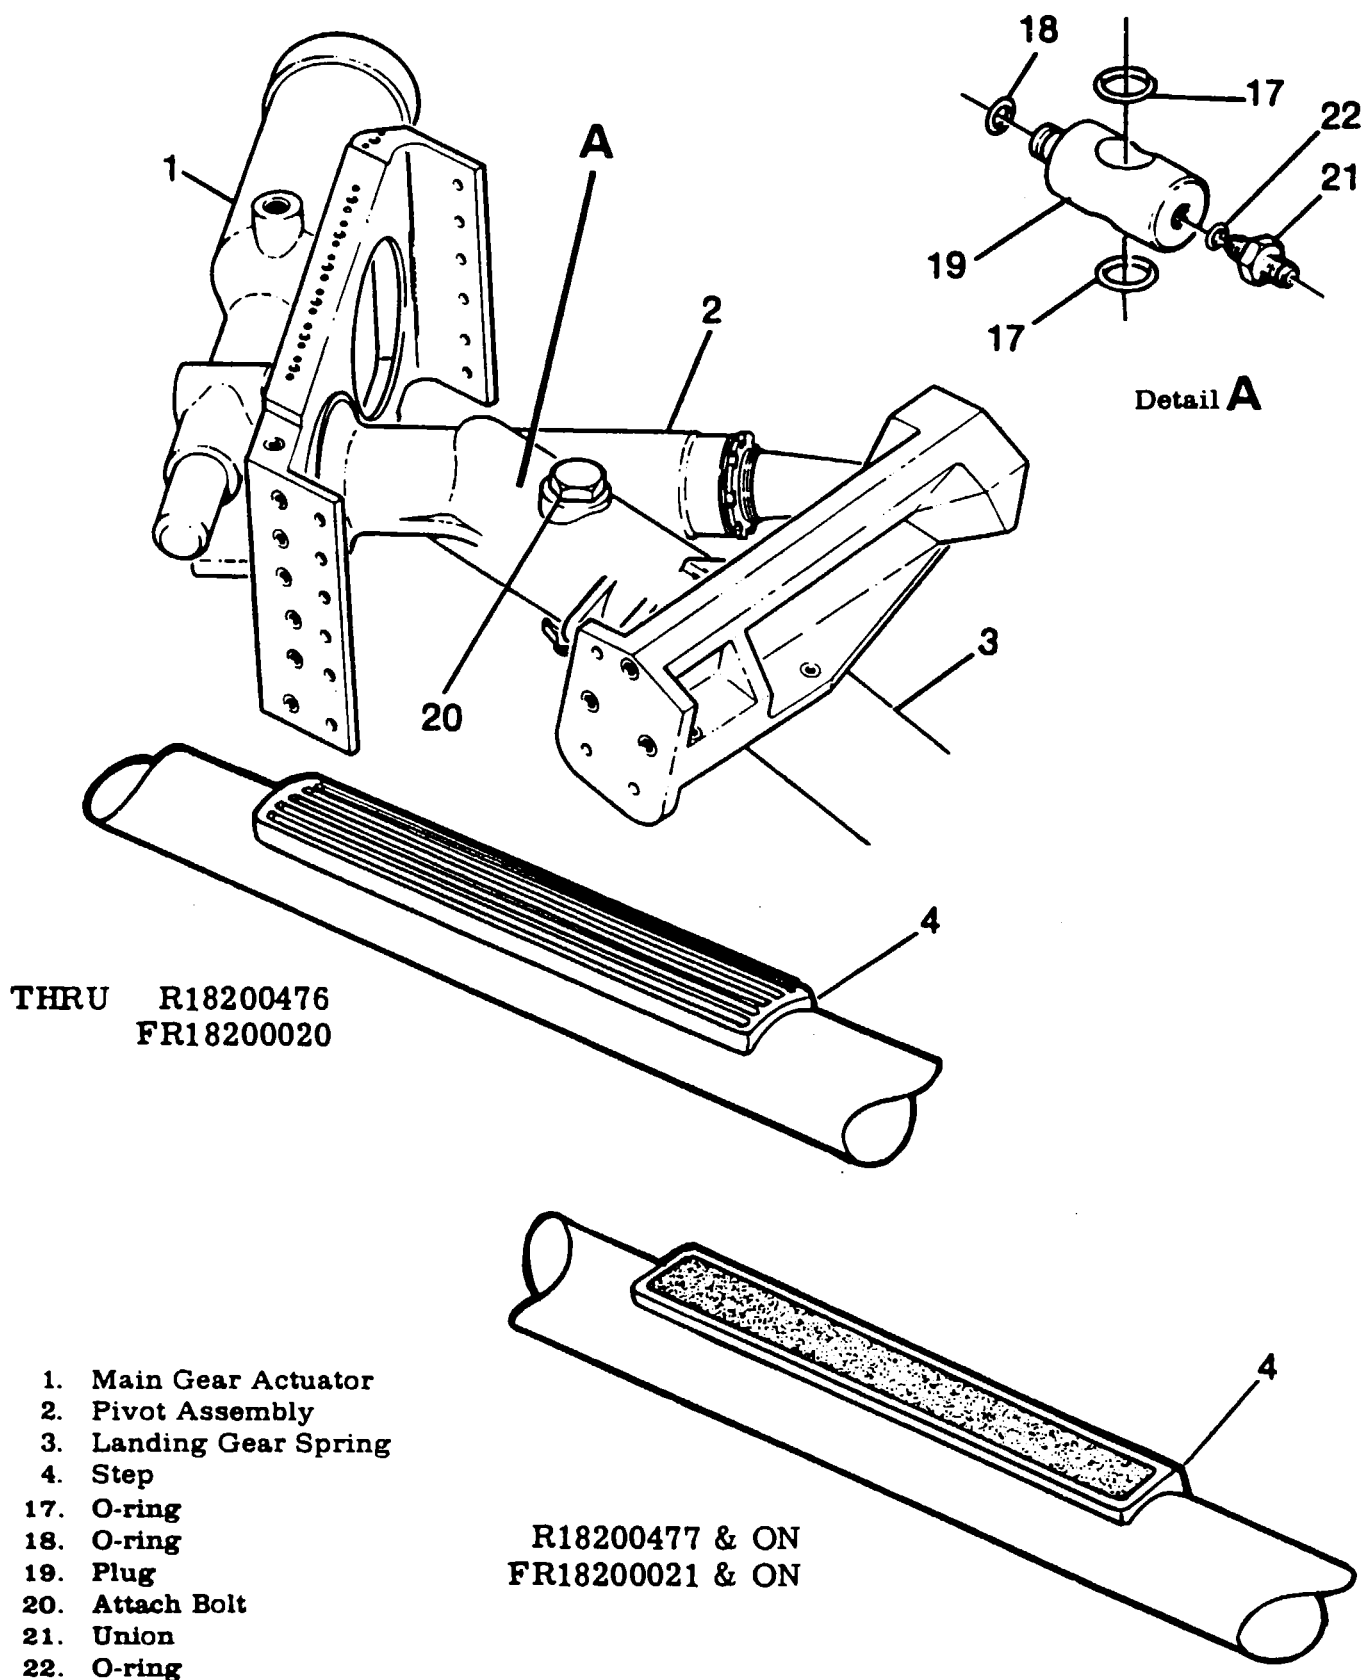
Main Landing Gear (Sheet 1 of 2)
